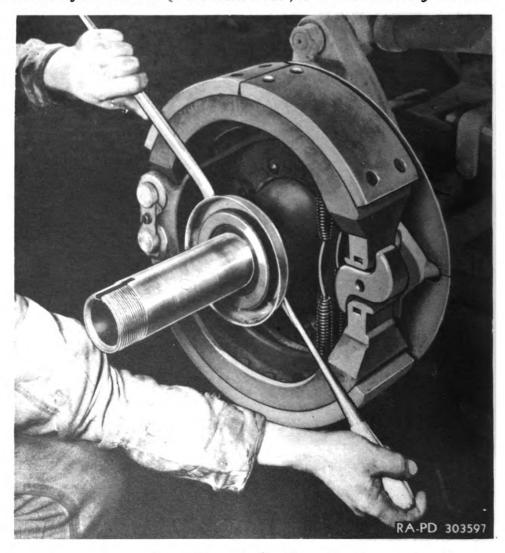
Prying Off Rear Wheel Bearing Grease Retainer
